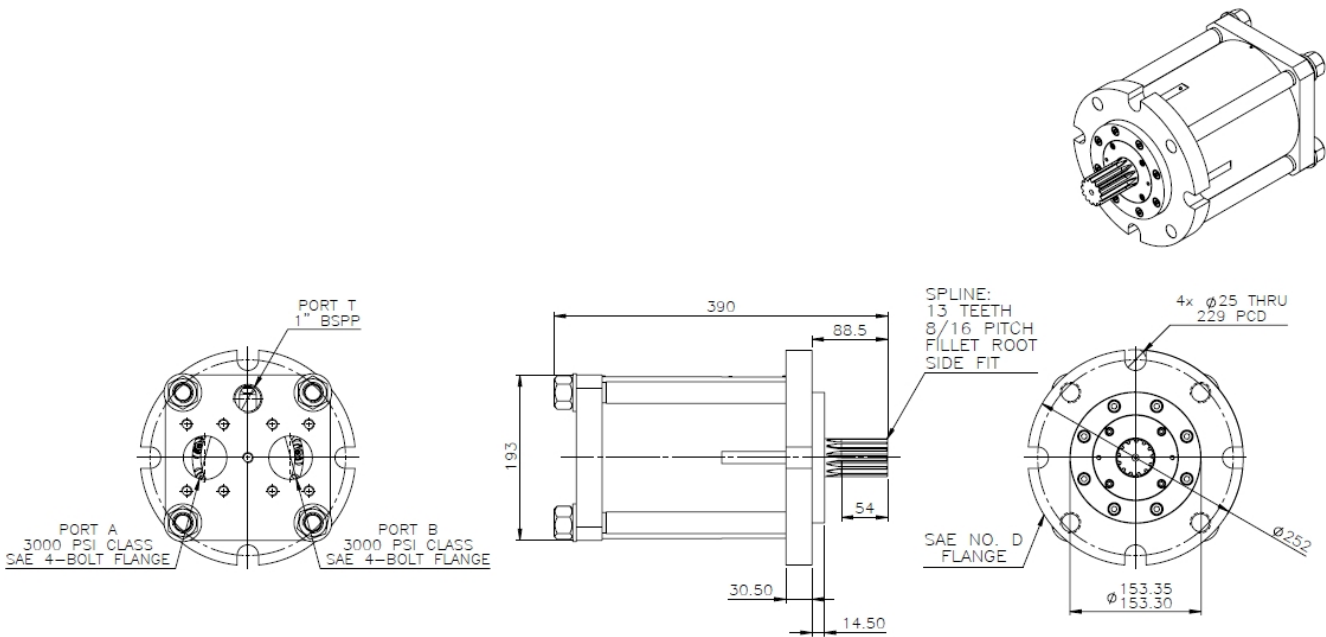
Dimensions and connections NOVA P180 bare shaft
